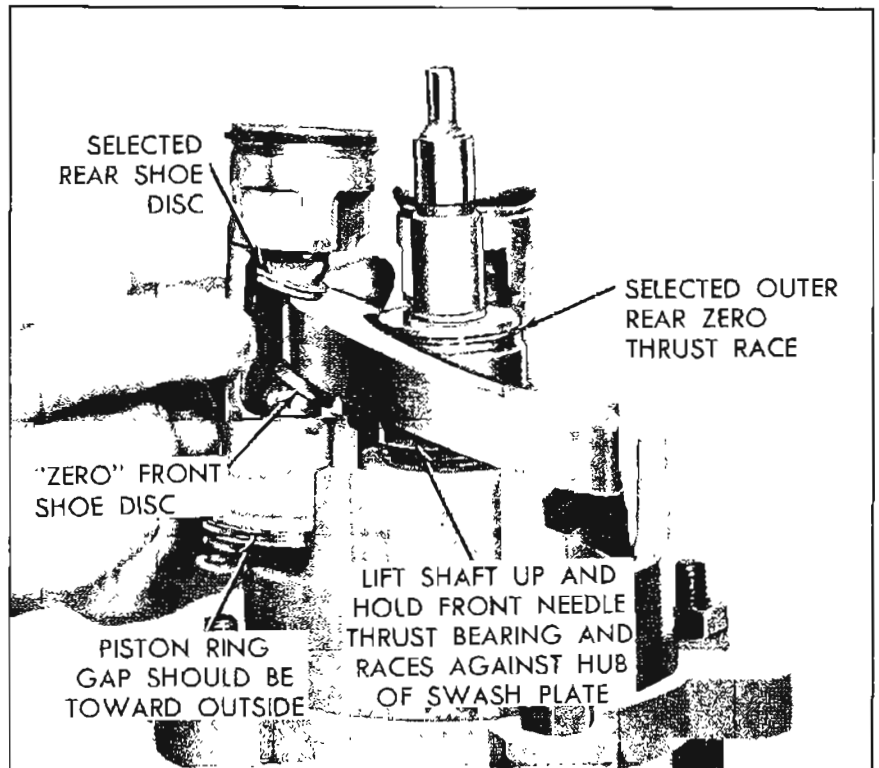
Installing Piston Assembly in Front Cylinder Half
